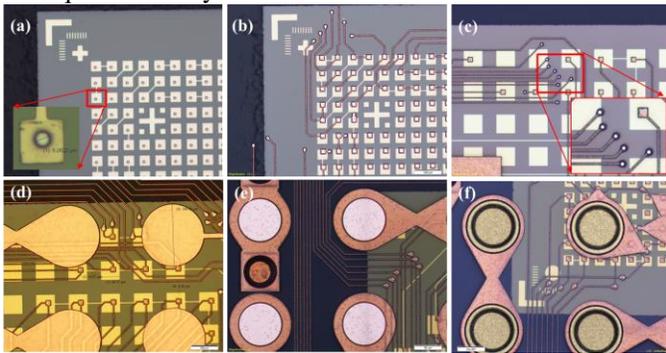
Mold first FOWLP front side RDL fabrication processes results (a) first passivation opening on bond pads of test chip (b) 1st RDL metal routing (c) 2nd passivation opening on 1st RDL pads (d) 2nd RDL metal routing (e) 3rd passivation opening on 2nd RDL pads (f) UBM formation for C4 bumping
